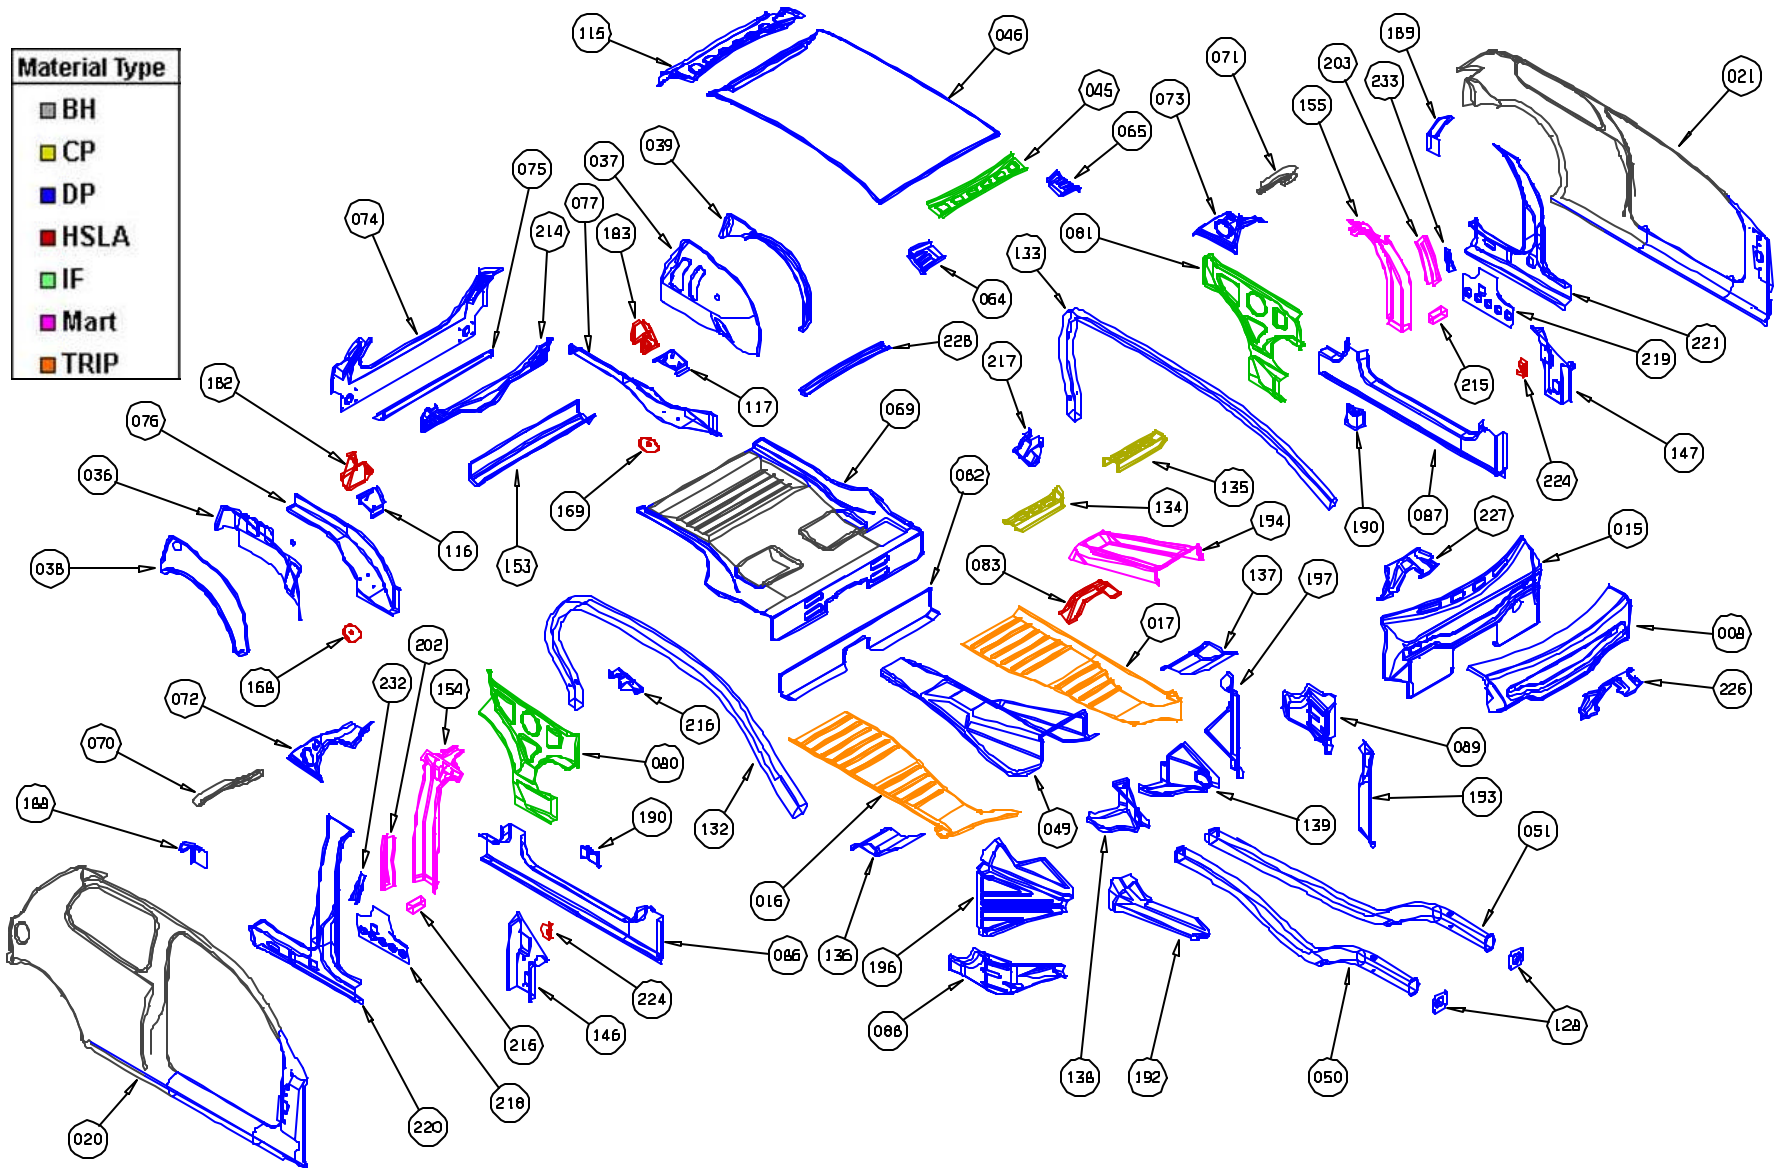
Exploded view of final ULSAB-AVC C-Class concept design, showing steel types selected for individual parts.
